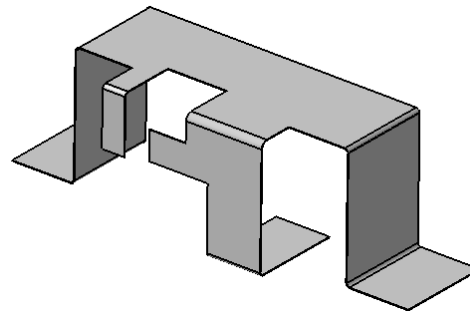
Sheet metal component after creating the wall on the edge
